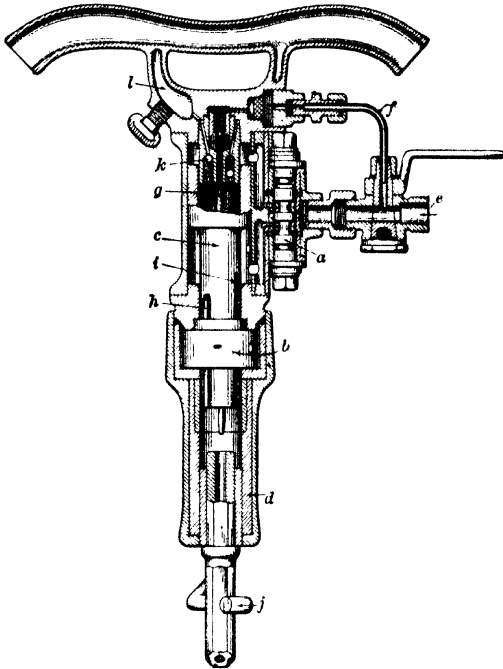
Sullivan "Air-Tube Rotator" (DP-33)
